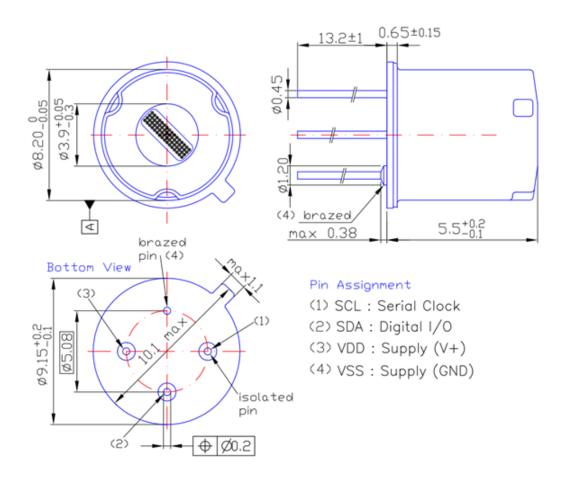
dimensional drawing of the HTPA16x4R1L2.85
